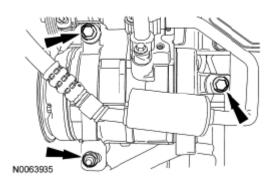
Locating A/C Compressor Bolts And Nut Courtesy of FORD MOTOR CO.
